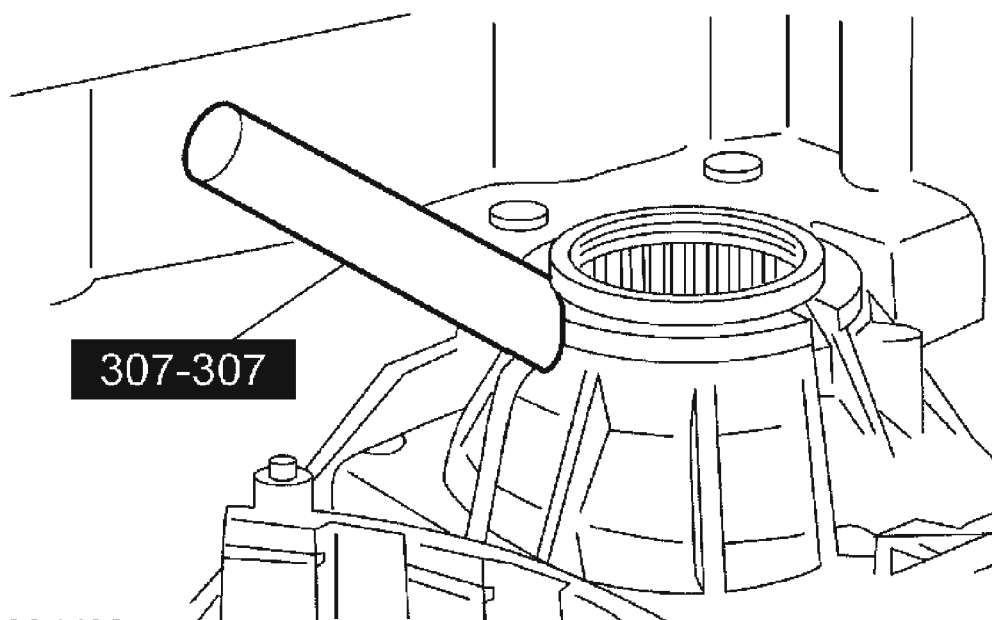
Installing Final Drive Lube Tube Seal
